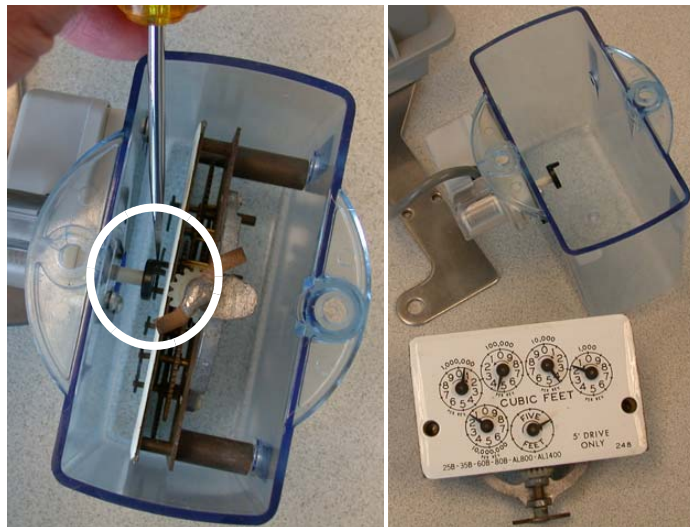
8. Disengage Badger Dial Wheel from Index; Remove Index from Cover
